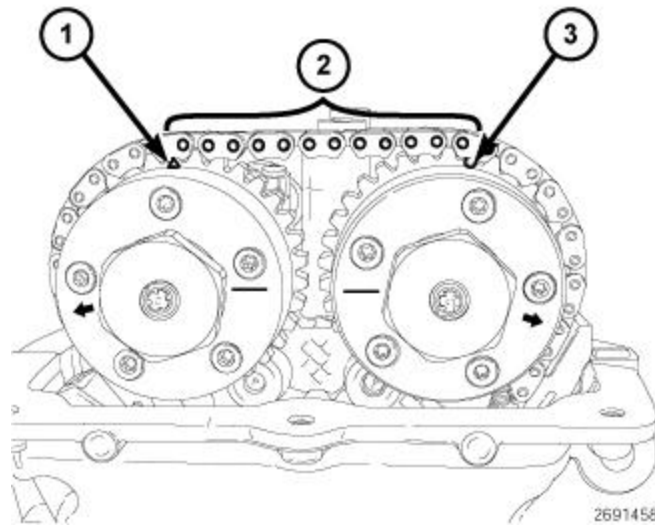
Chain Pins, Arrows, Scribe Lines, Cam Phaser Triangle Marking & Circle Marking
